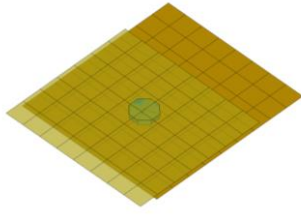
Detail view of a spot weld using a traditional approach.
